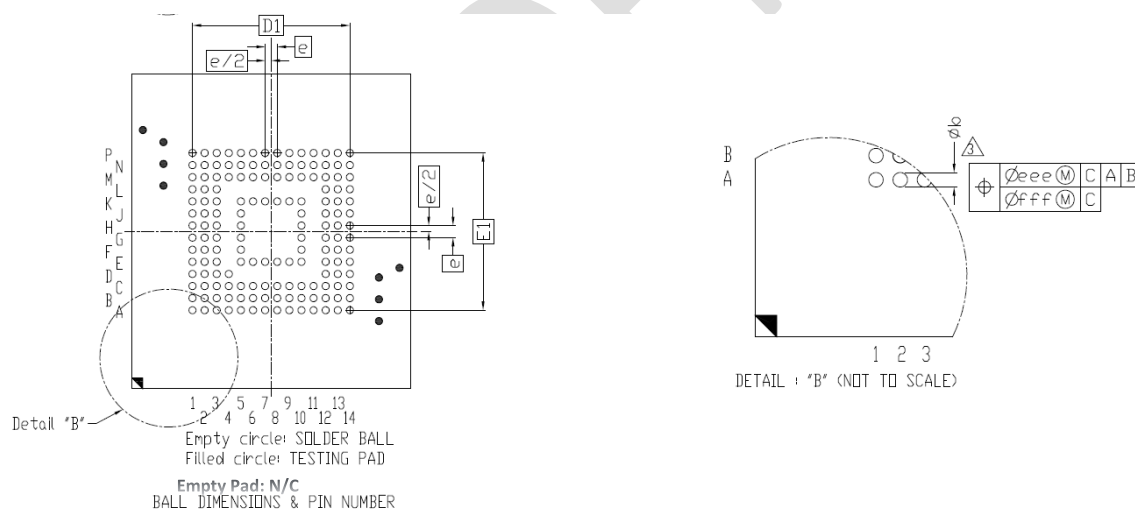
iNAND 8521 – Package Outline Drawing – Bottom View
